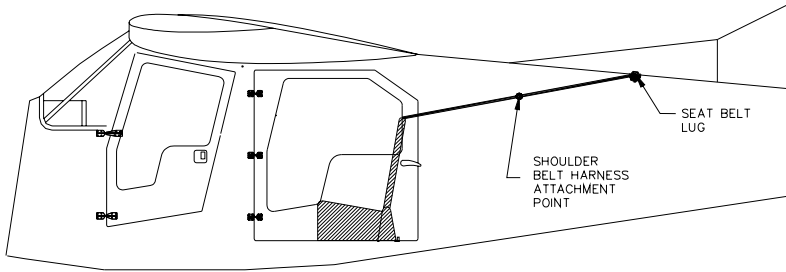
Shoulder Harness Attachment Arrangement – Side View
